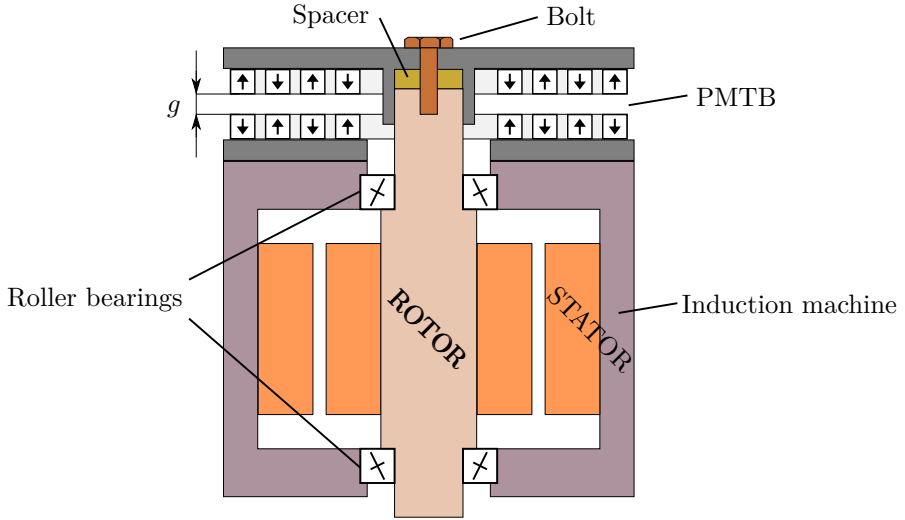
PMTB on a vertical shaft electrical machine. The rotating part of the PMTB is fixed on the shaft by the bolt. A spacer is used to adapt the airgap thickness.
